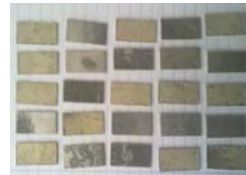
Specimen after Machining (Acrylic): Size –400X500mm and Thickness 1mm
